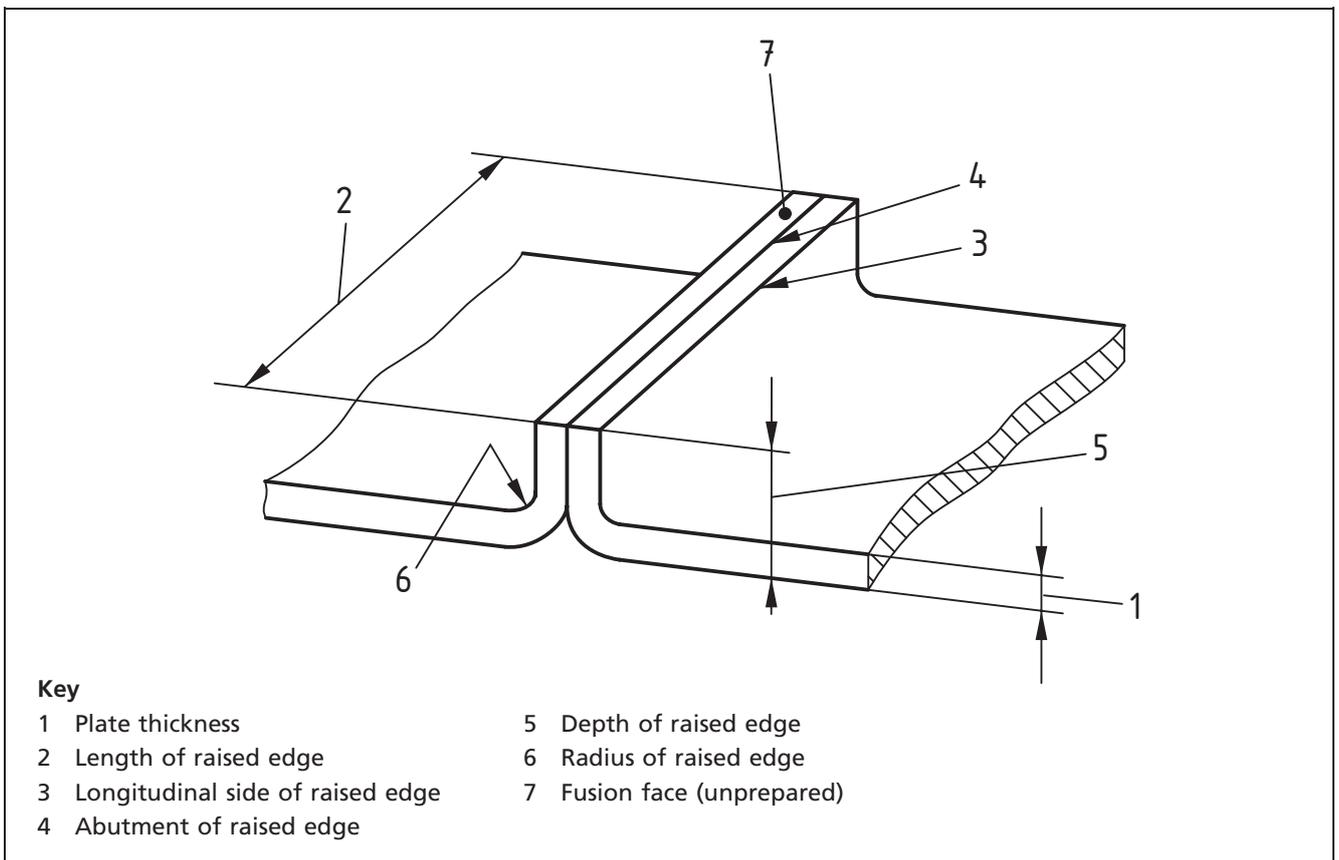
Preparation for butt weld between plates with raised edges
